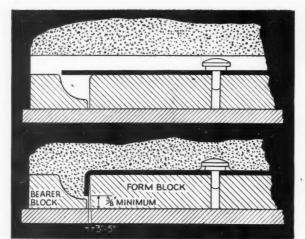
Drawing of bearet block designed with curved inner edge. Drawing shows spring - back allowance on form block.
